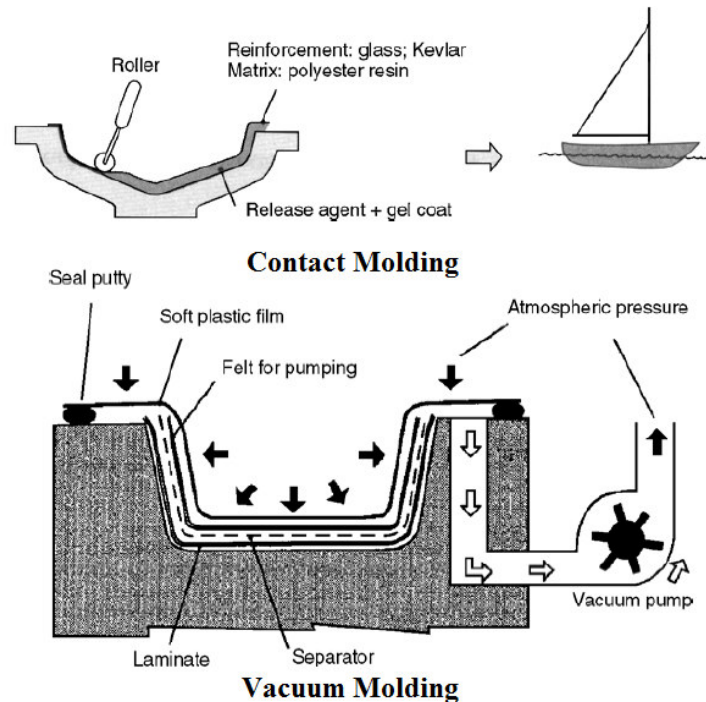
Contact and vacuum molding processes. (Daniel & friends, 2003)
